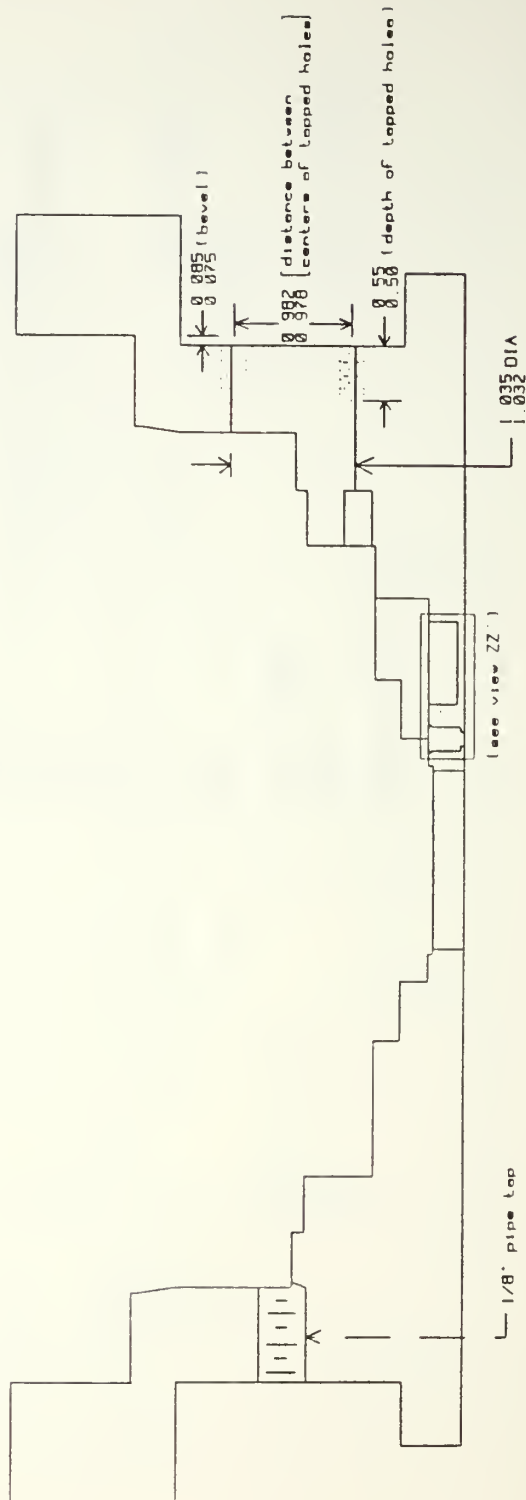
Cross-sectional View along Y-Y' of Figure C-1 Showing the Electronics Feed-through Port and Gas Fill Port
